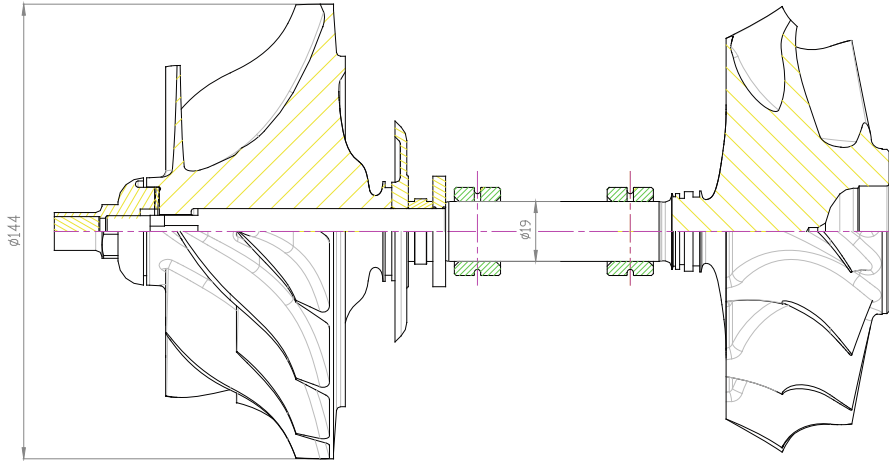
Typical turbocharger rotor supported in floating ring bearings
